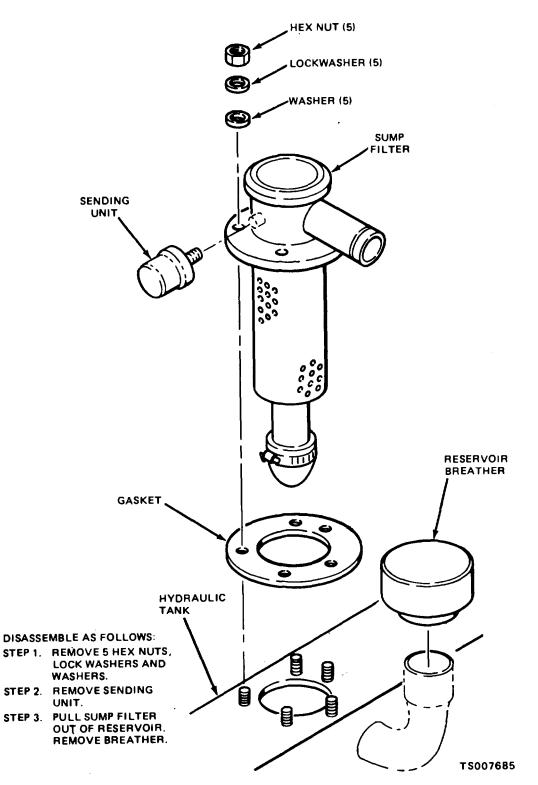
Hydraulic Oil Filter, Disassembly and Reassembly
